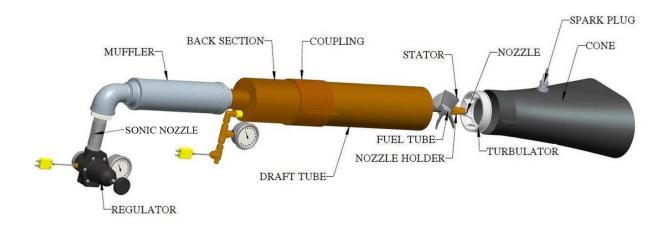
S-2. Schematic of the Sonic Burner - Exploded View
